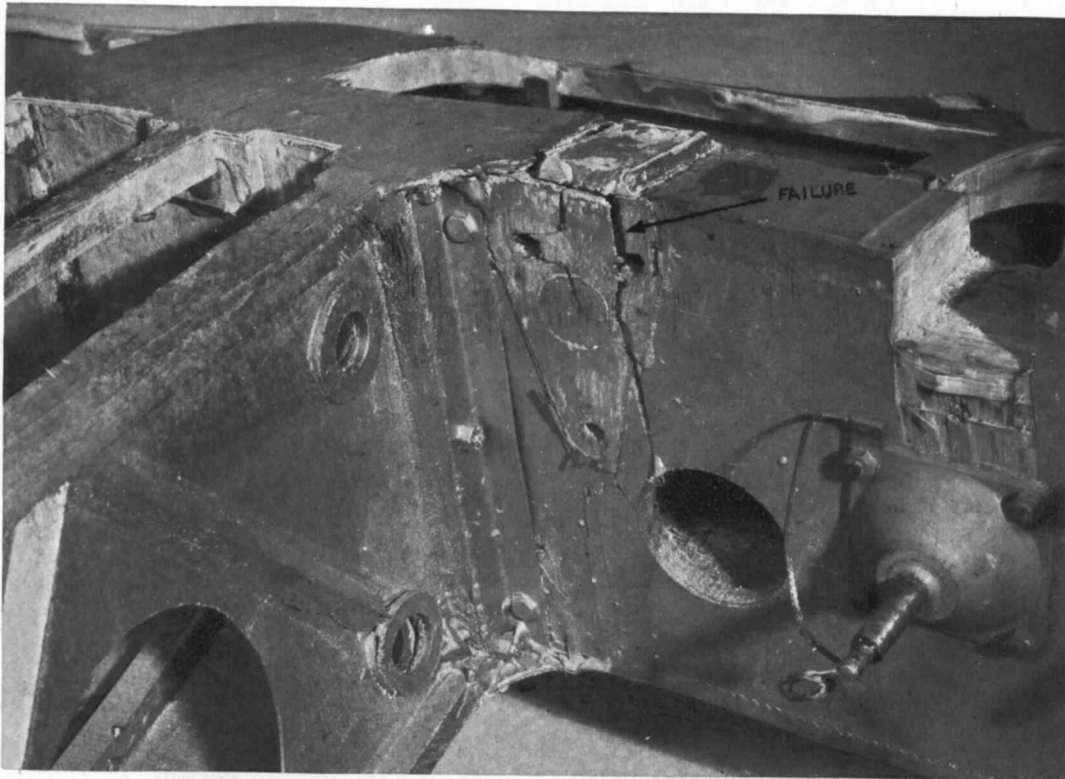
Typical failure of wooden tailplane (*Anson*).
